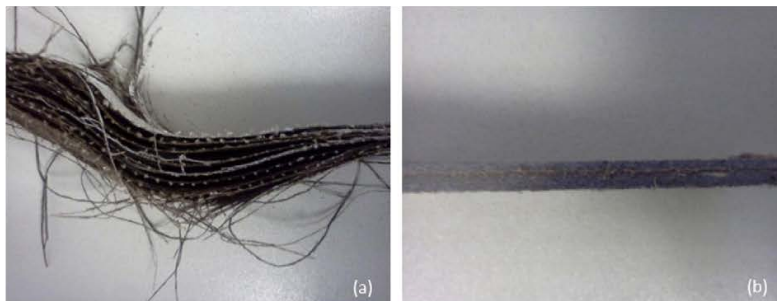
Failed samples during tension (a) delamination; (b) fracture.
